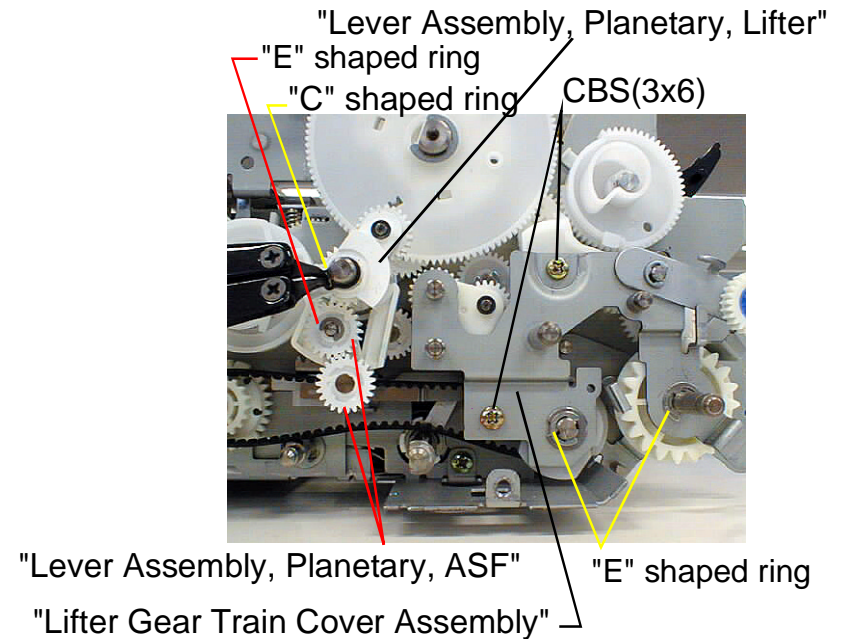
"Lifter Gear Train Cover Assembly" and "Lever Assembly, Planetary, Lifter" Removal
